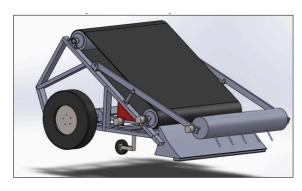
First drawing in SolidWorks. Source: Author.
